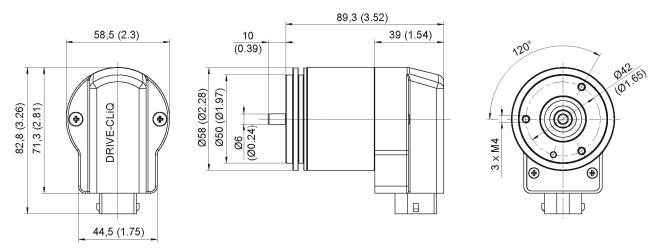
Dimension drawing of synchronous flange, all data in mm and (inches)
